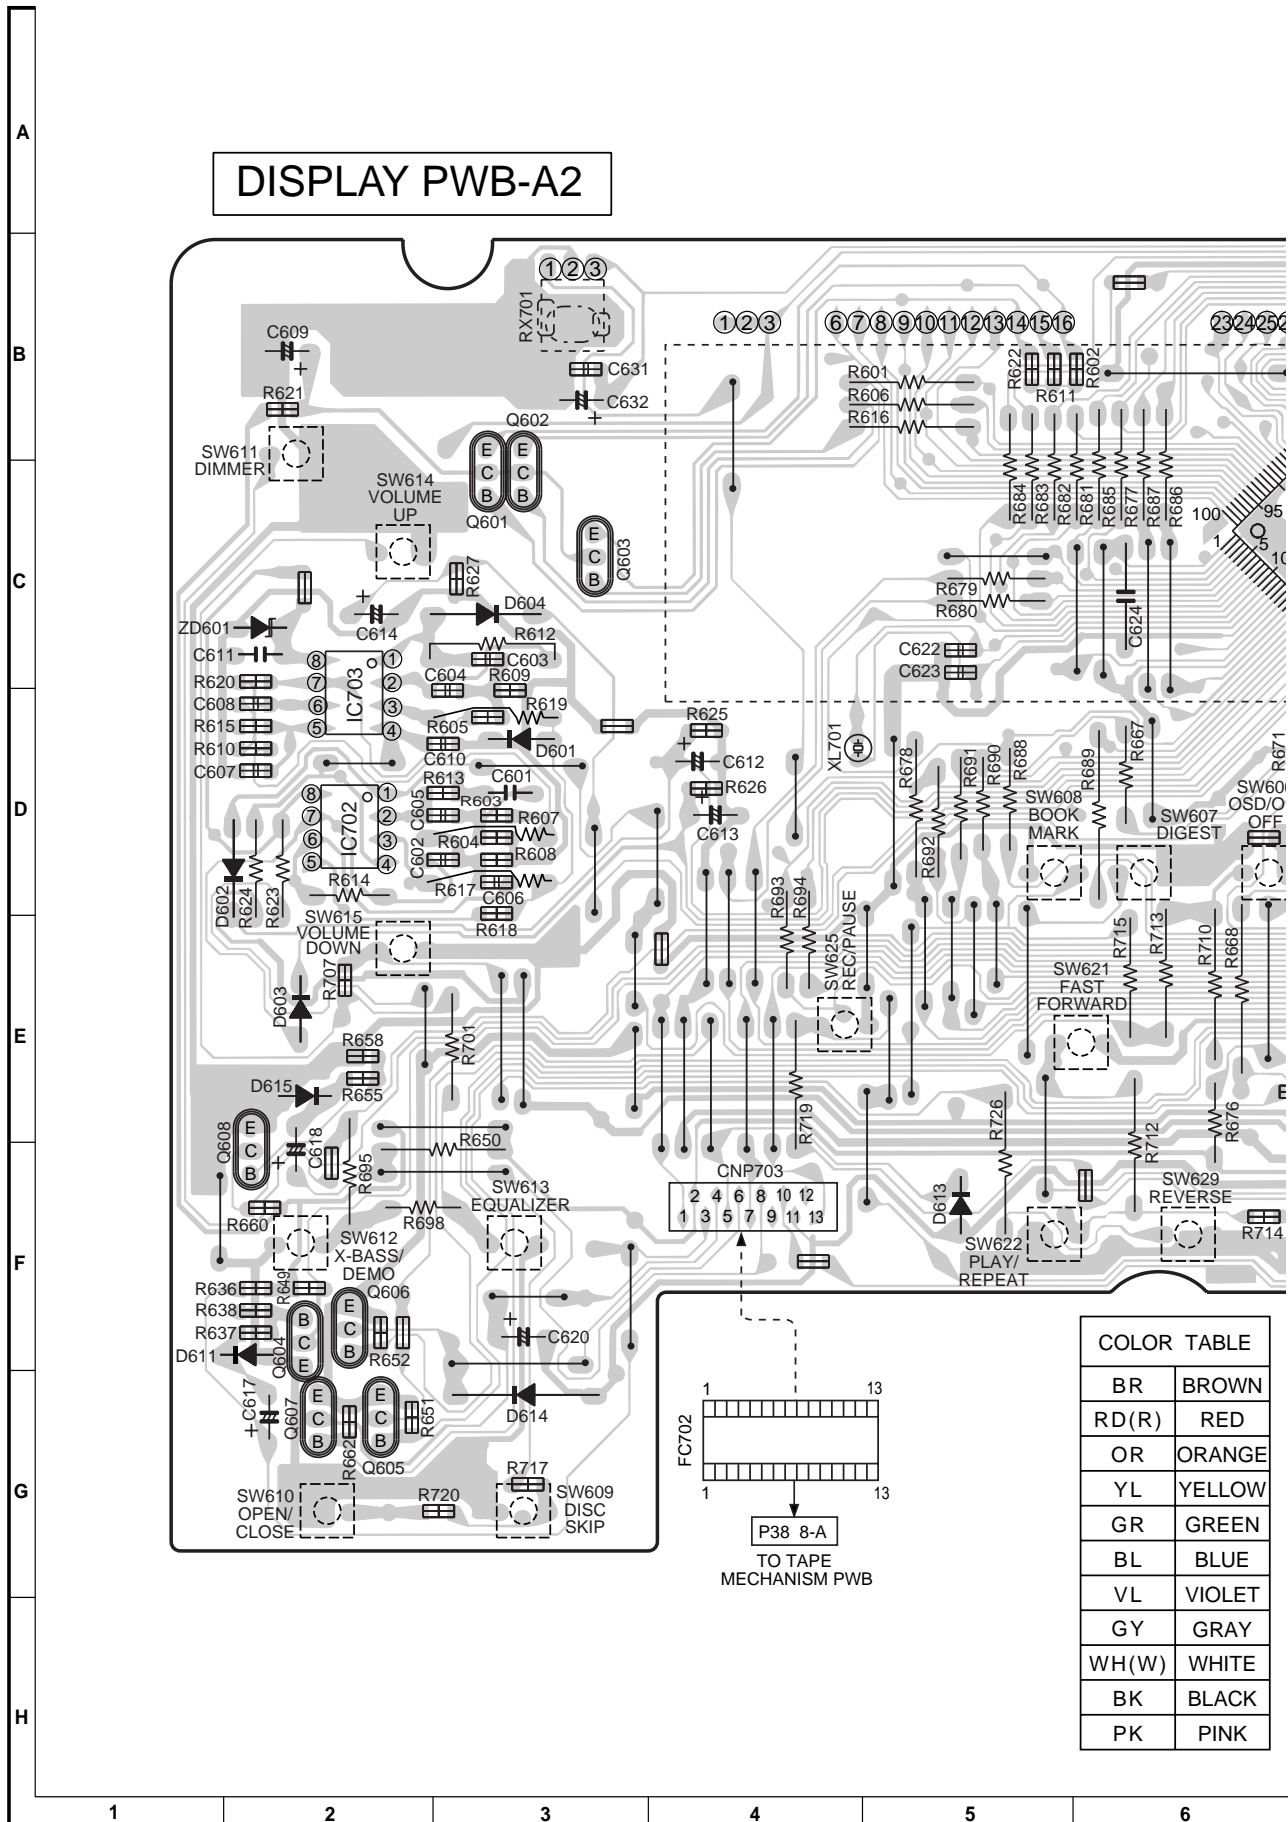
WIRING SIDE OF P.W.BOARD (4/8)
